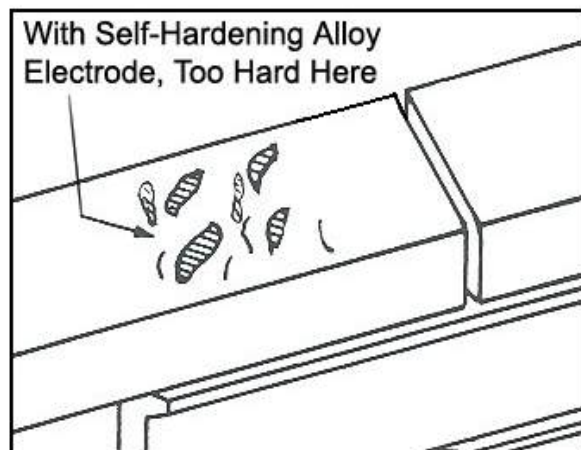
Line drawing from an actual photograph of welded rail end after 3 years' service showing spalling due to excessive hardness at junction of weld and rail. This is typical of results obtained with a self-hardening alloy electrode with conventional welding procedure.
